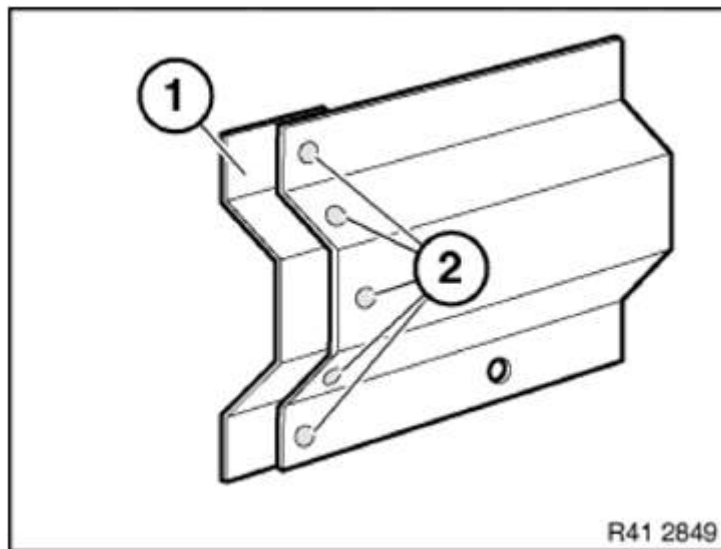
Identifying Reinforcement Plate And Plug-Weld
